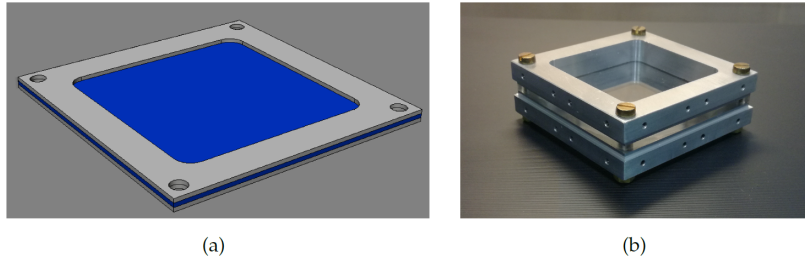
Technical drawing (a) and picture of the mechanical frame (b) of the SC.
